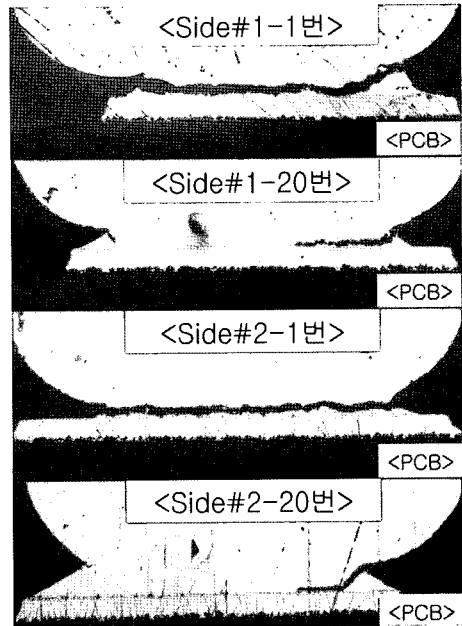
The exterior solder joint at each corners in SnAgCu-PBGA package.
